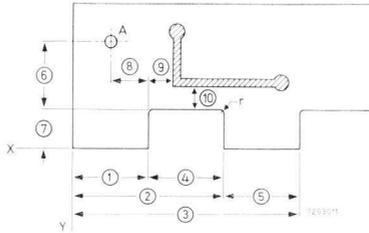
Reference dimensions for PCB with cut-outs.
